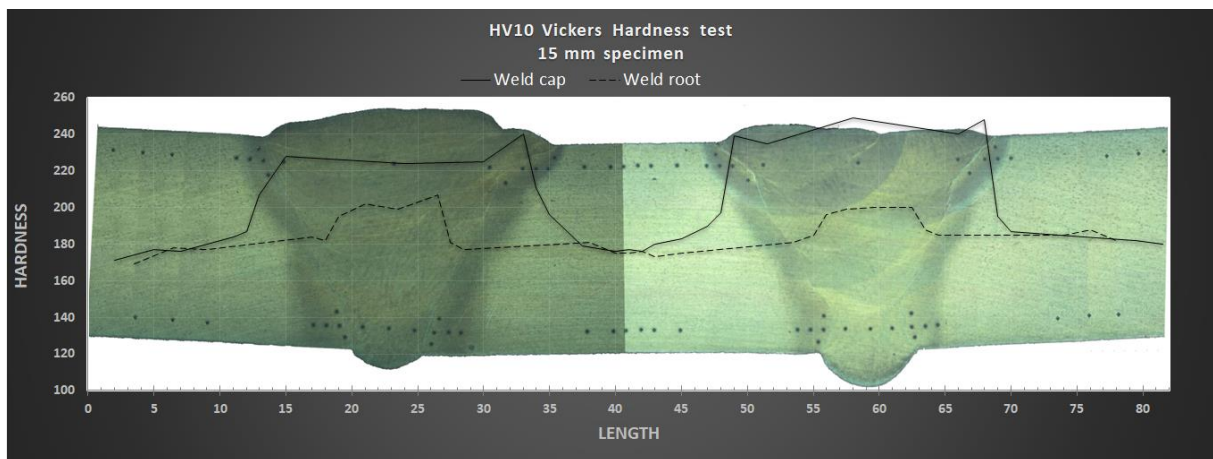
HV Vickers Hardness Test 12 mm between the welds.
